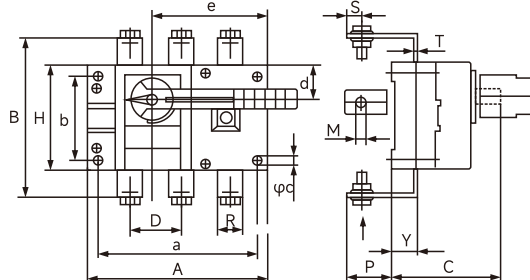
HGL-160~630A/B behind board wiring disconnect switch
